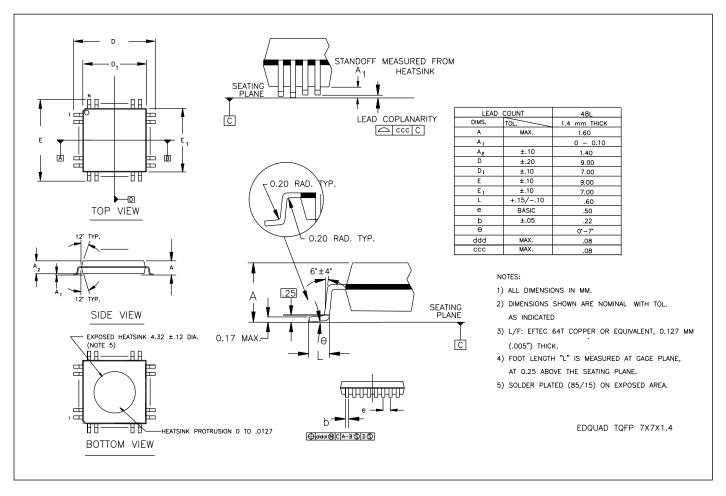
Package 48 pin TQFP-EDQUAD. All dimensions are in mm.
